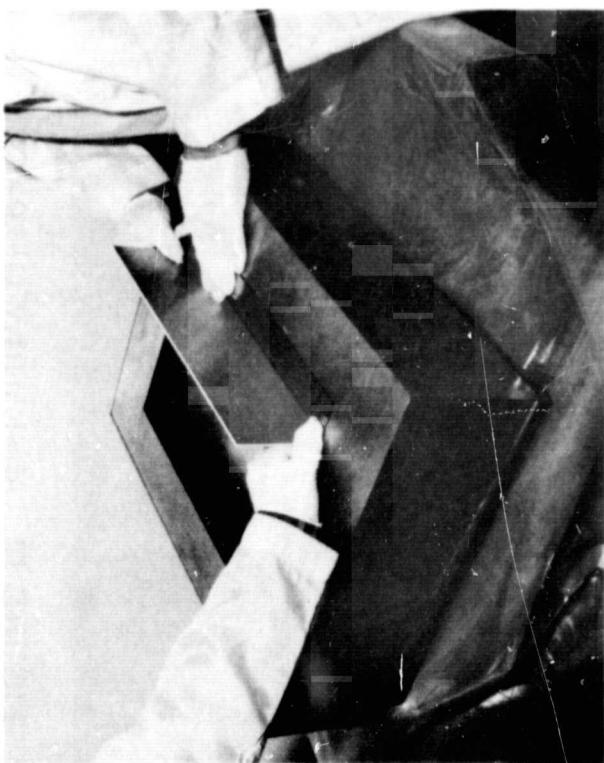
ASSEMBLY OF PACK, STEP 3
